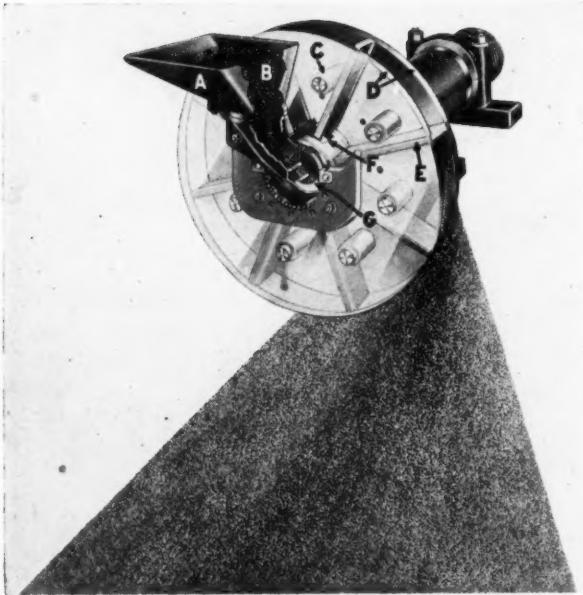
Phantom view of an airless blasting-abrasive thrower, showing (A) Abrasive funnel, (B) Abrasive (metallic shot or grit), (C) Spacers between side plates, (D) Special steel side plates, (E) Cast alloy blades (removable), (F) Cast alloy control cage (stationary in operation). Change in direction of abrasive flow can be obtained by turning the control cage, which changes the position of the opening, and (G) Cast alloy impeller. (Rotates with the wheel). This unit carries the abrasive to the opening in the control cage where it is discharged to the bladed section of the wheel.
